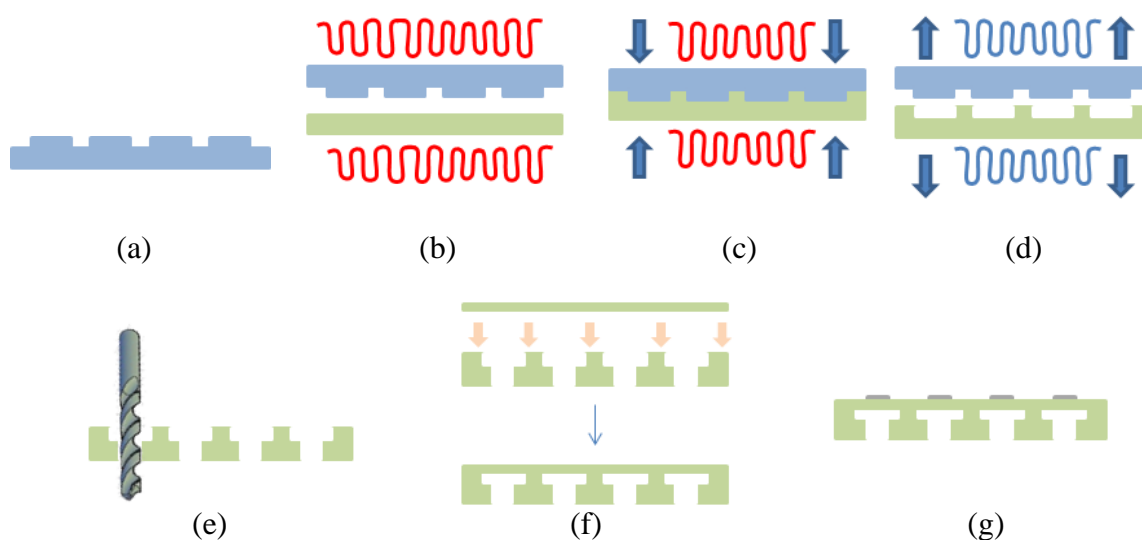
General fabrication process. (a) Master mould fabrication; (b) Heat both mould and COP substrate (c) Apply embossing force on the substrate by pressing the mould, under vacuum (d), Cool substrate and mould down to de-embossing temperature (e) Drill fluidic inlet and outlet ports; (f) Seal
